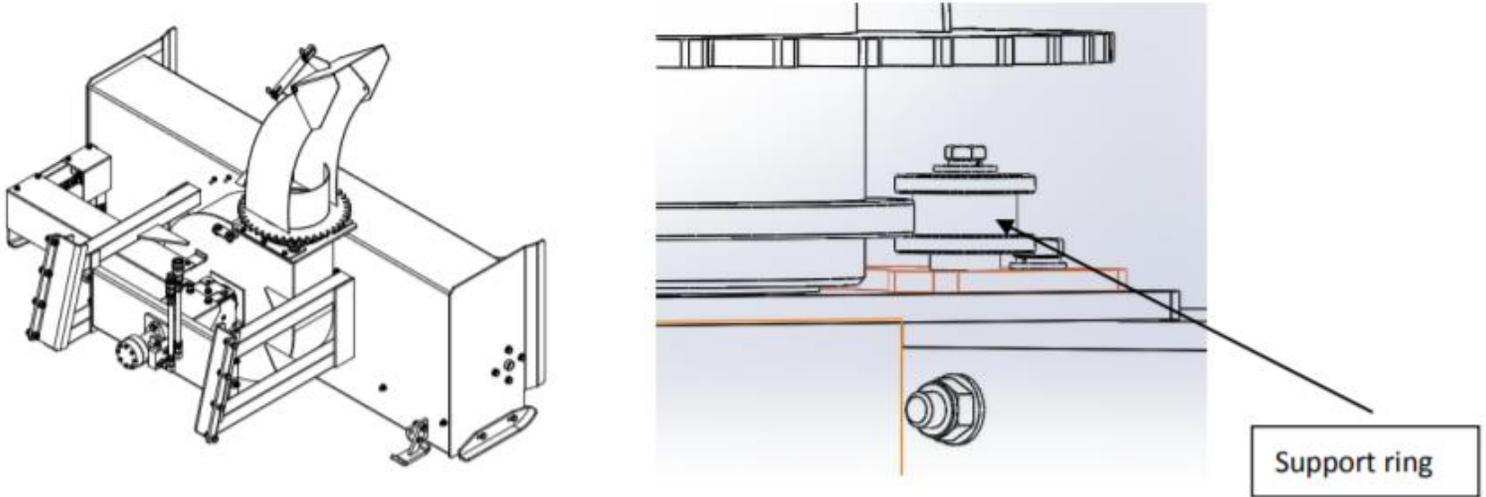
Discharge Chute Assembly, Snow Spray Mask Assembly, and Fittings 2
